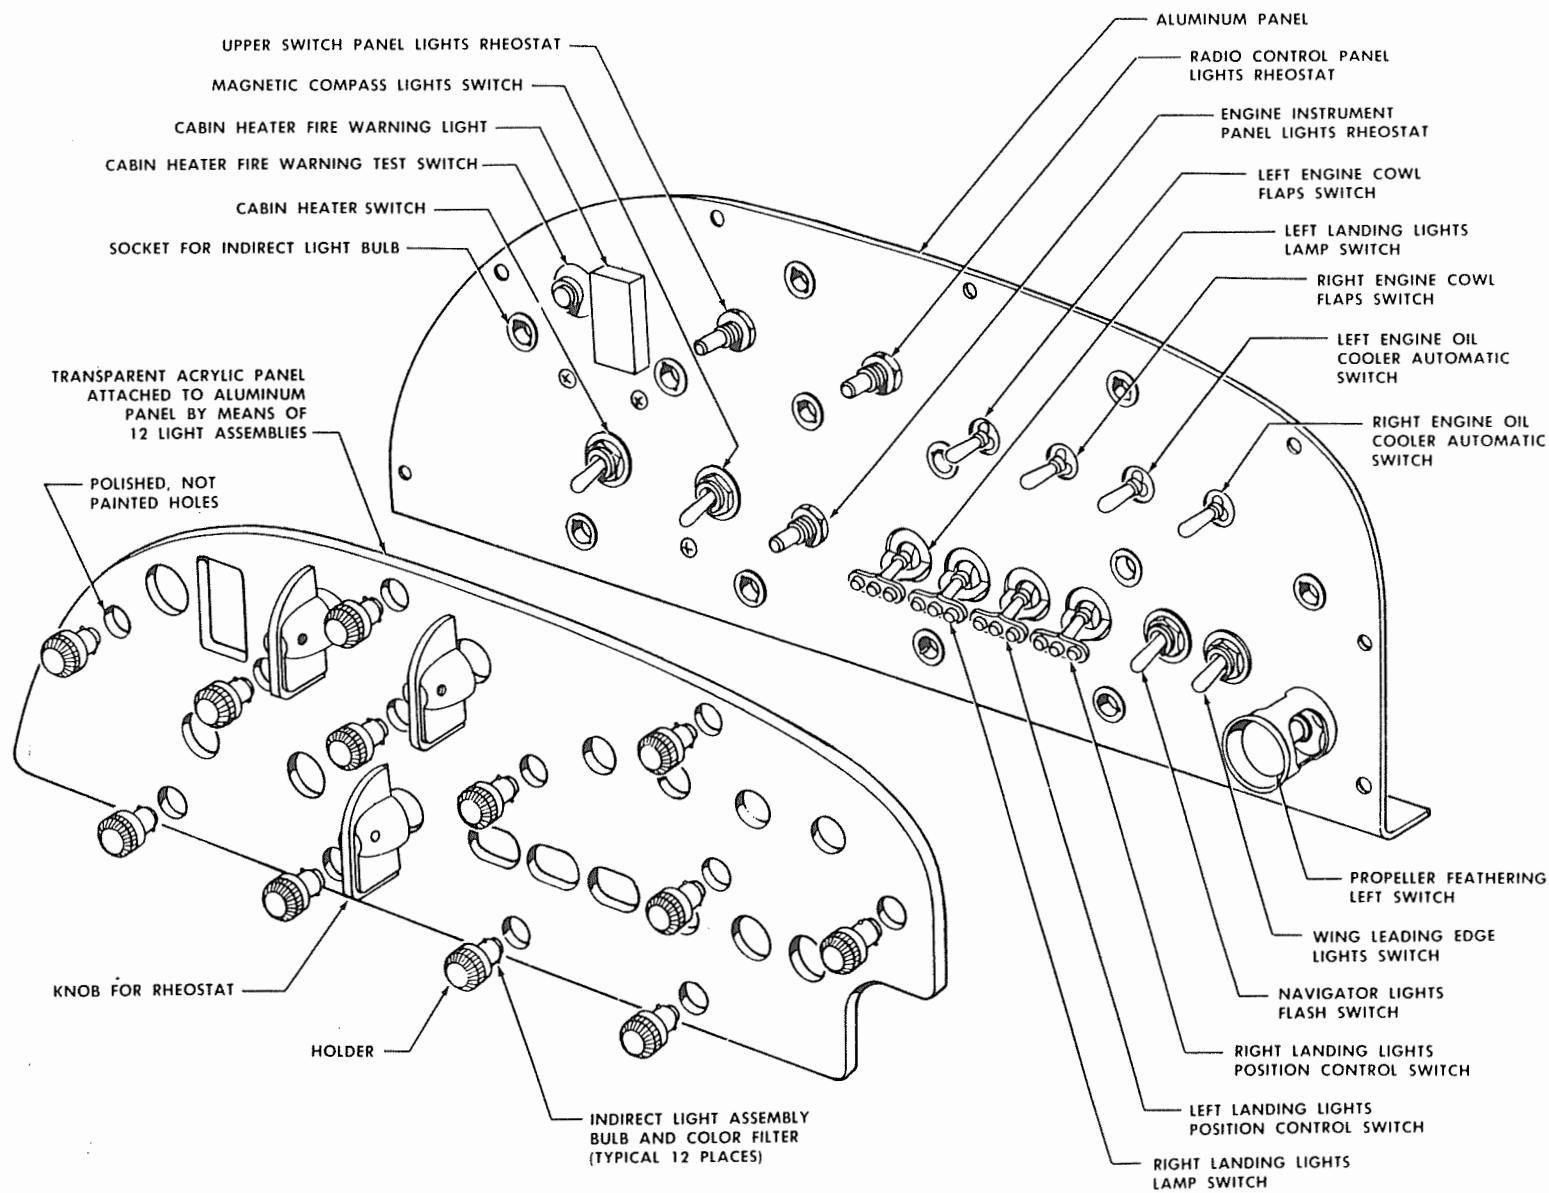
Pilot's Overhead Electrical Panel Assembly
